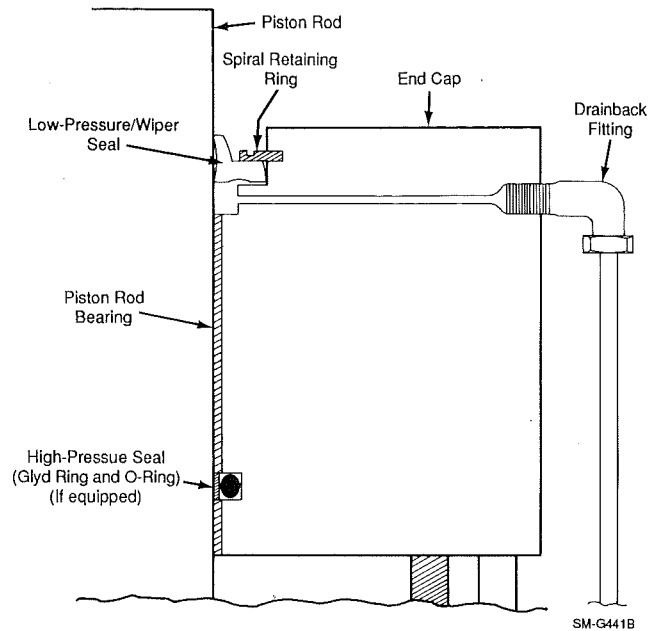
Illustration of Piston Rod Seals and Bearing
